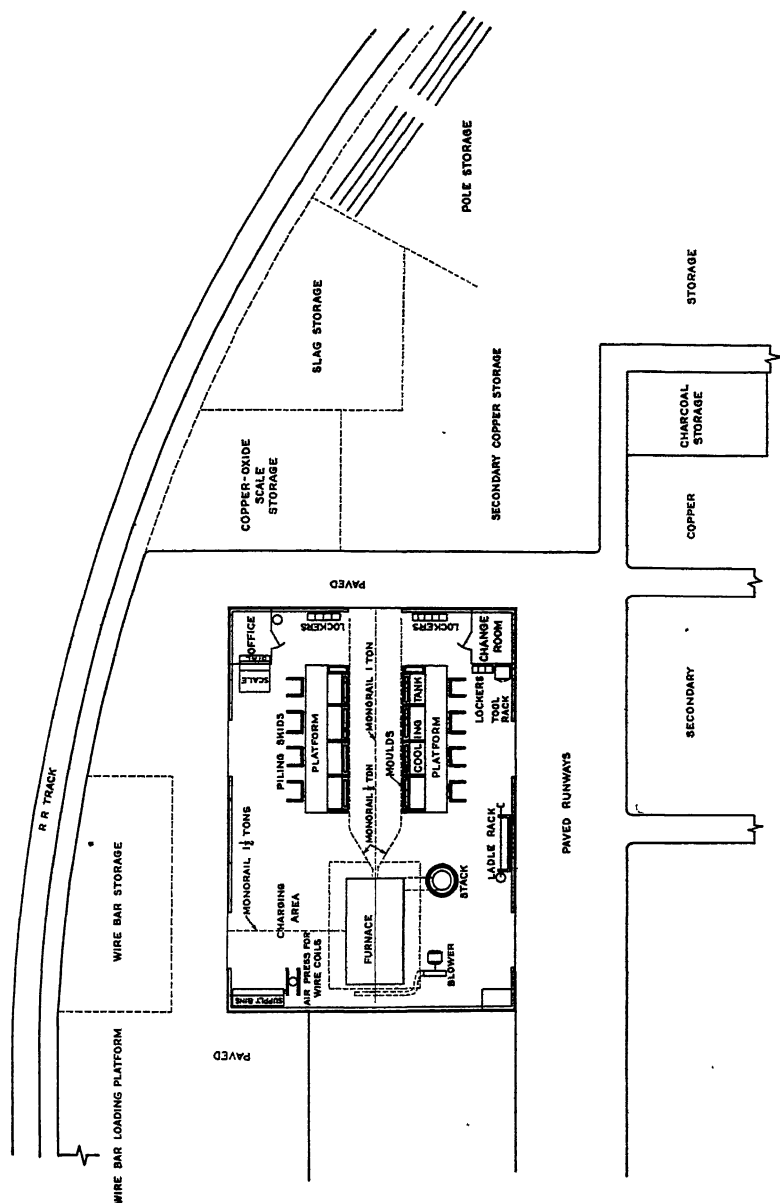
DIAGRAM OF GENERAL PLANT LAYOUT.
